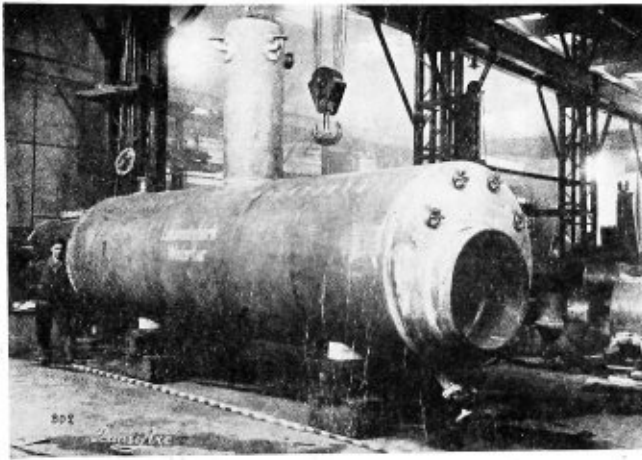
Cornish type welded boiler designed for 196 pounds working pressure
